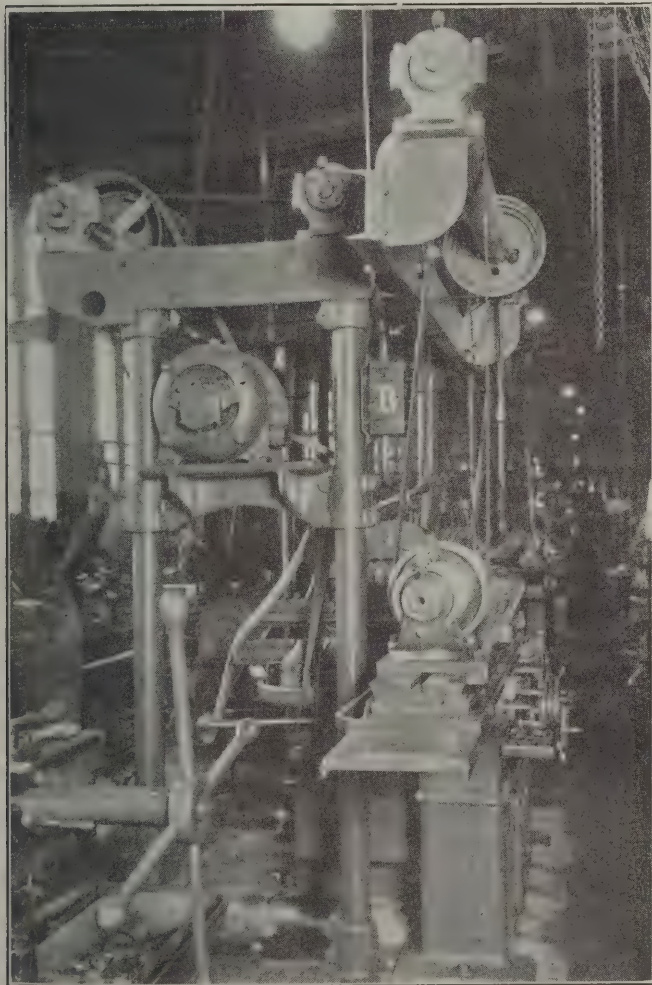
Tool Grinder Showing Control Button Box Handy for Operator
